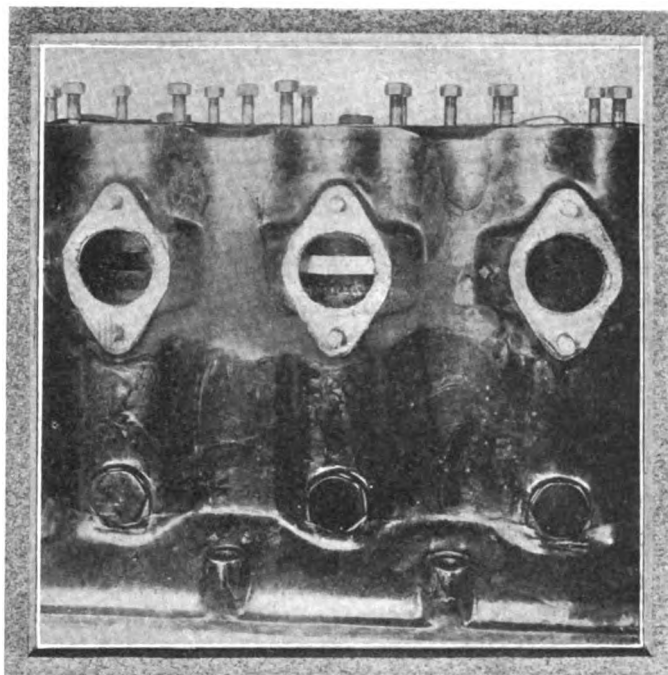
General appearance of the three-block cylinder, showing the intake ports with the manifold and cylinder heads removed
